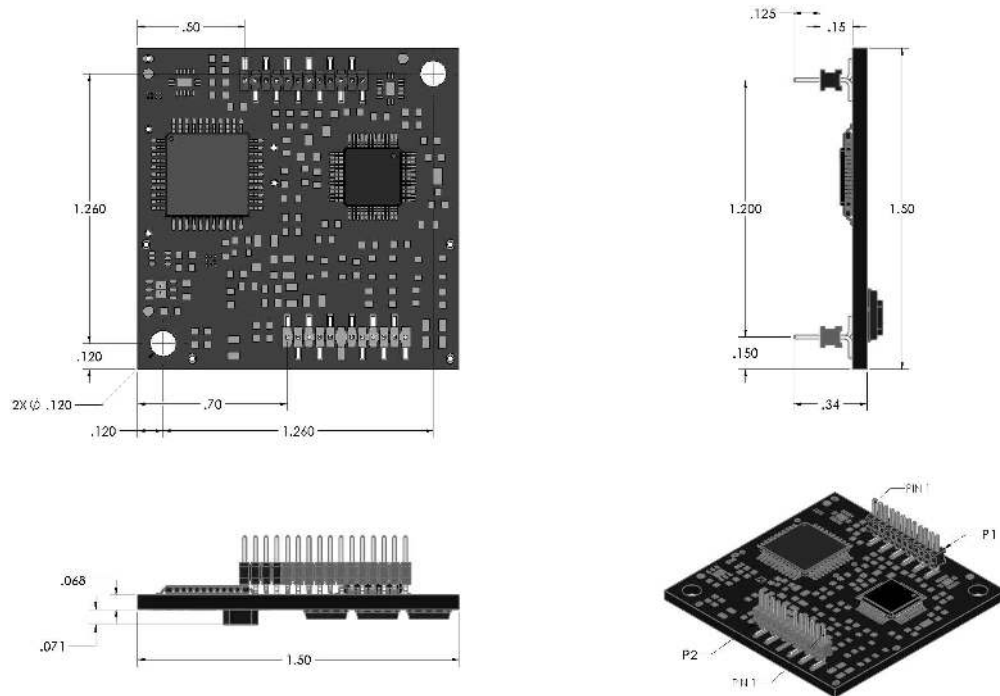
AZB10A4IC Mounting Dimensions (inches and [mm])
